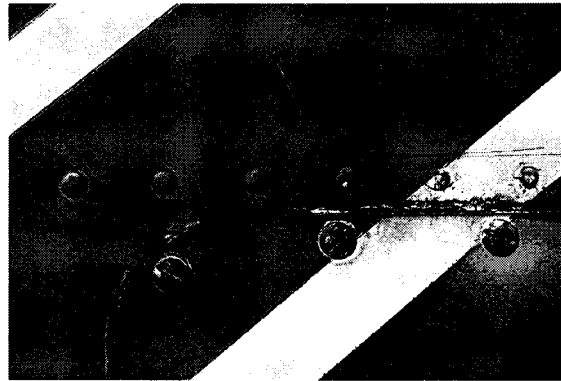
Illustration of the coating failure around riveted and joint area.
